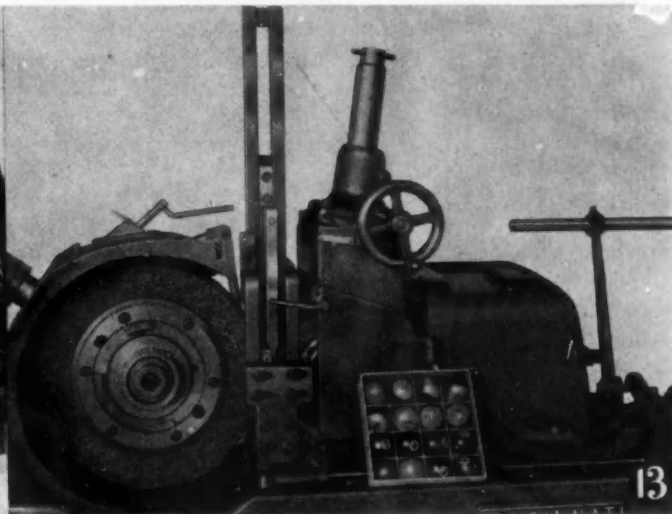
Grinding Billiard Balls by the Centerless In-Feed Method
